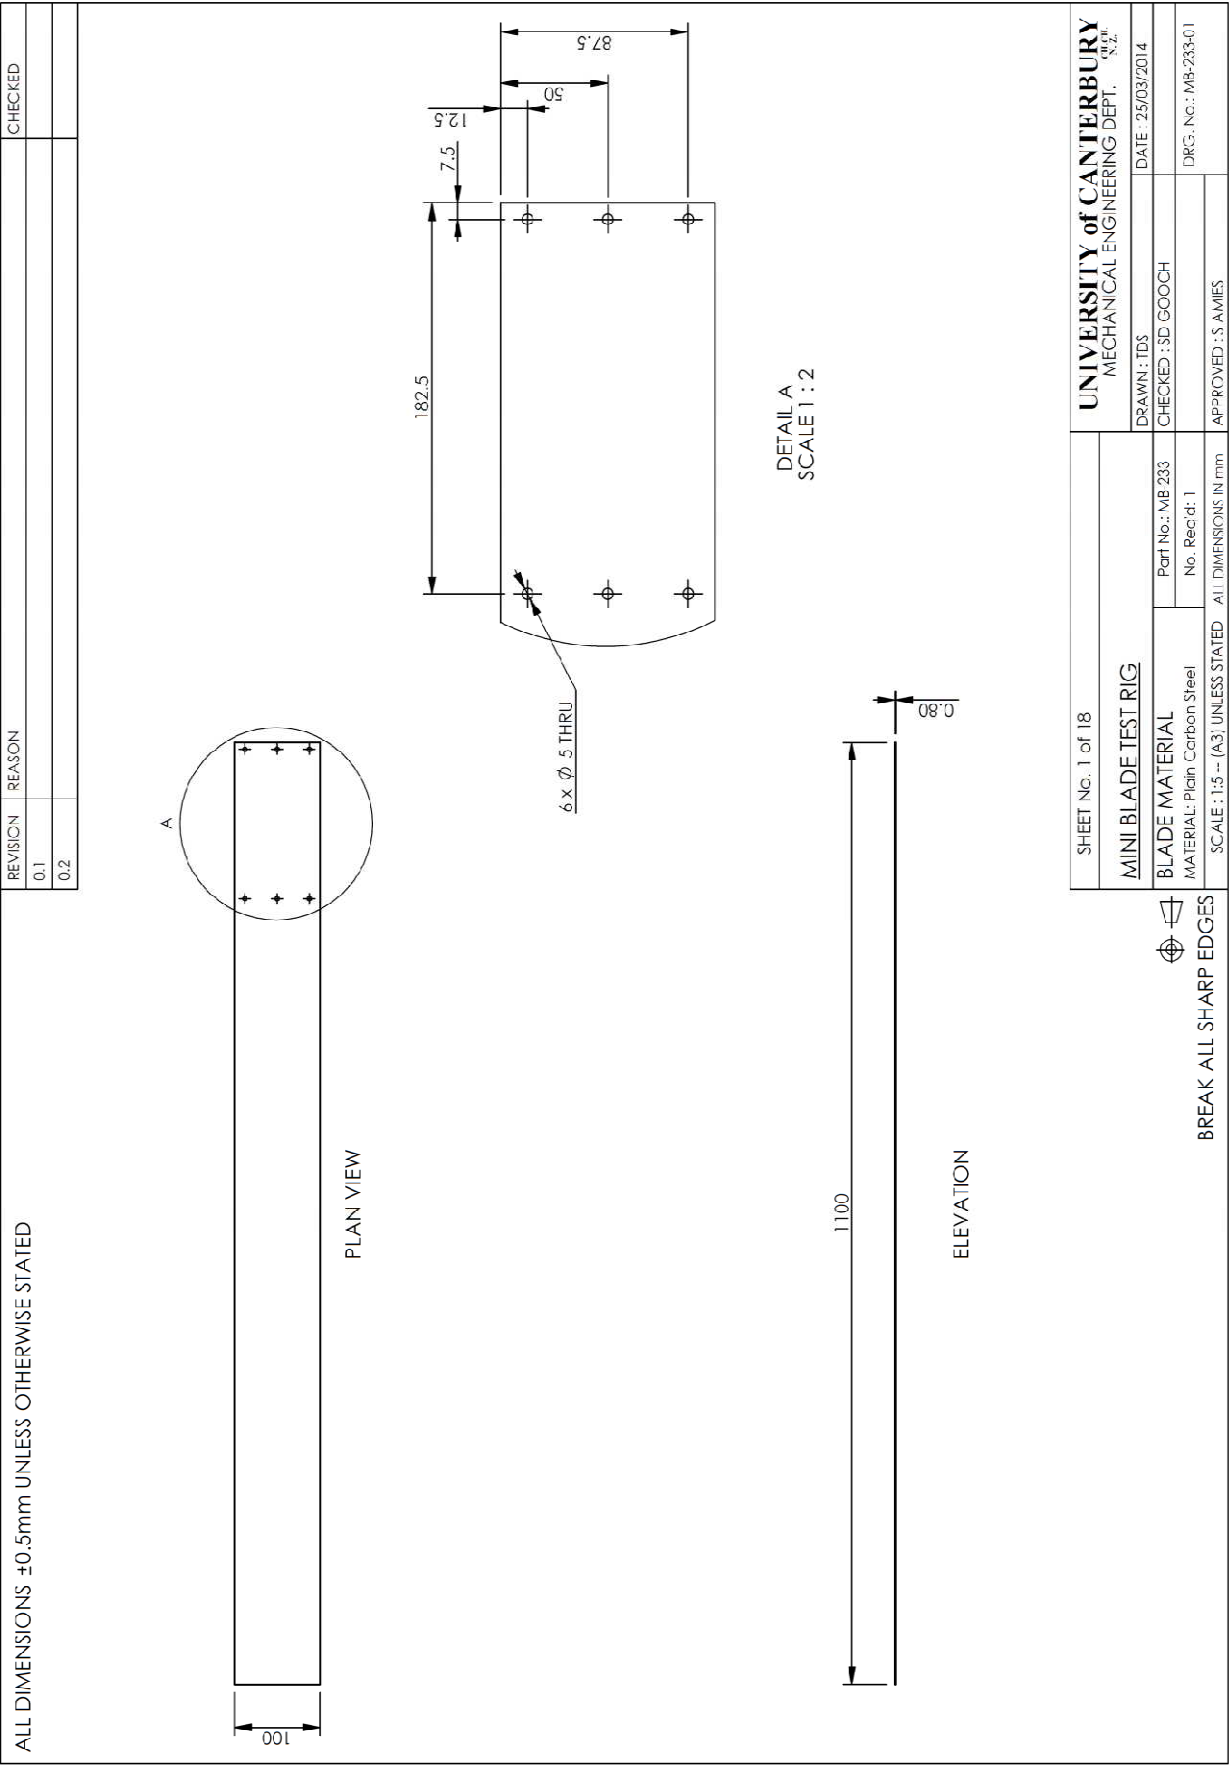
Manufacturing drawing for the blade material in variable stroke mechanism test rig.
